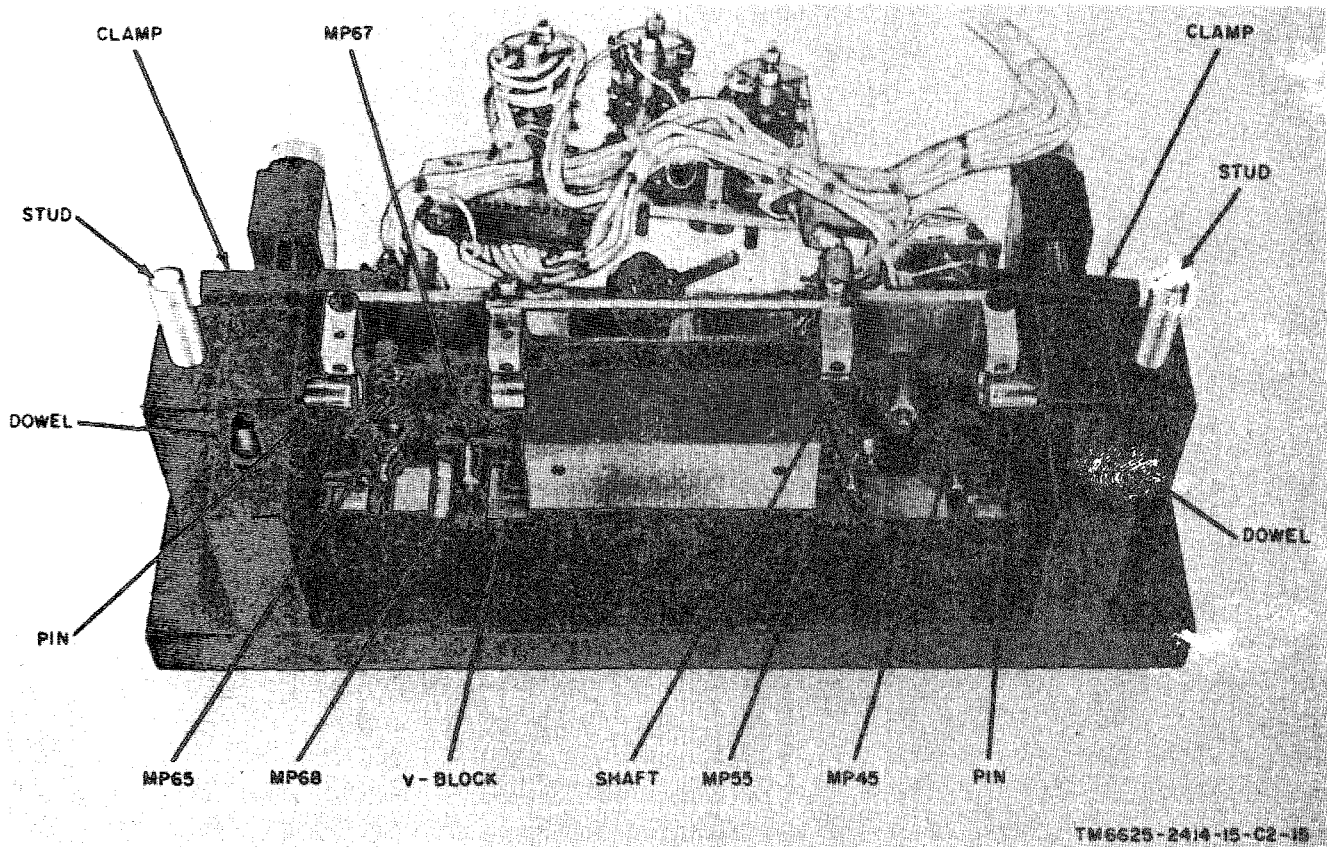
AN/ARC-116 tuning control assembly mounted in support and drill fixture with top plate removed.
